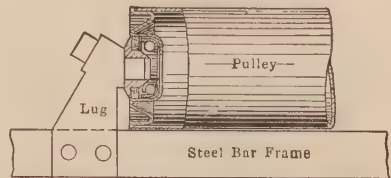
Detail of 3-pulley Ball Bearing Idler without Through-shafts. (Robins' Conveying Belt Co.)
